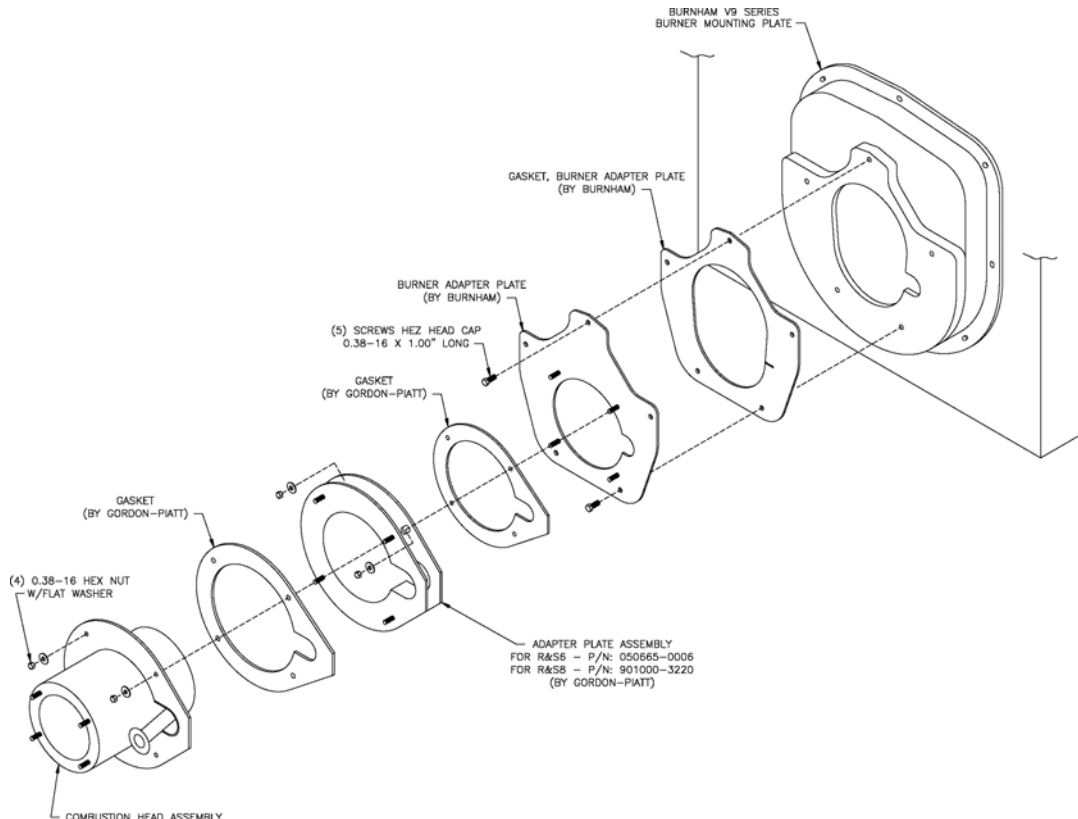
Burner Mounting Plate Details (Gordon-Piatt)
